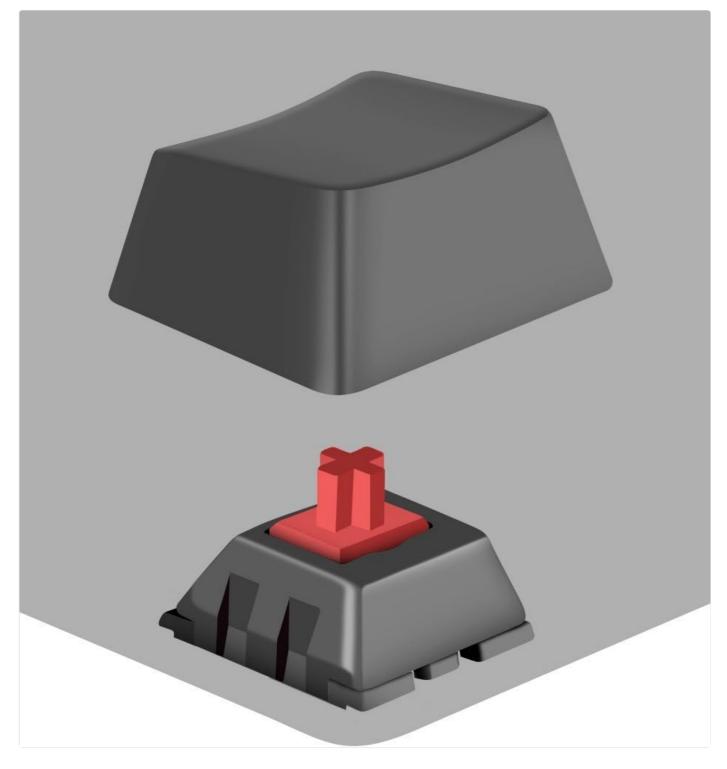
Close-up of a mechanical key switch. This image illustrates the red Kaihua Kailh switch mechanism beneath a keycap, demonstrating the mechanical design.
